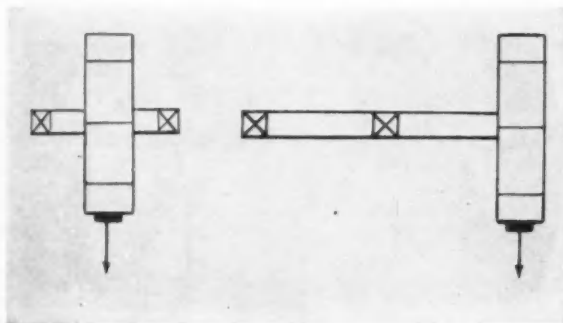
Pump impeller at left is mounted between bearings and has a small amount of allowable unbalance. Same pump impeller with unbalanced condition and mounted as shown at right may vibrate excessively. Kinetic balance tolerances should be 5-10 times closer than for pump mounted between bearings.
